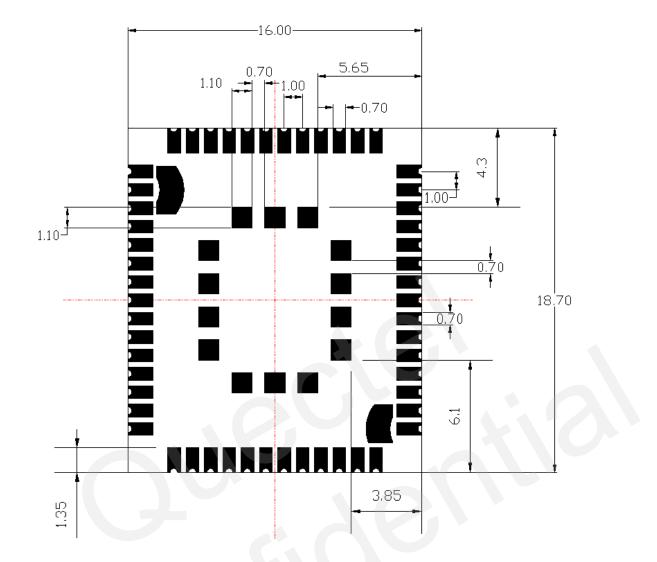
MC60 Bottom Dimensions (Unit: mm)
